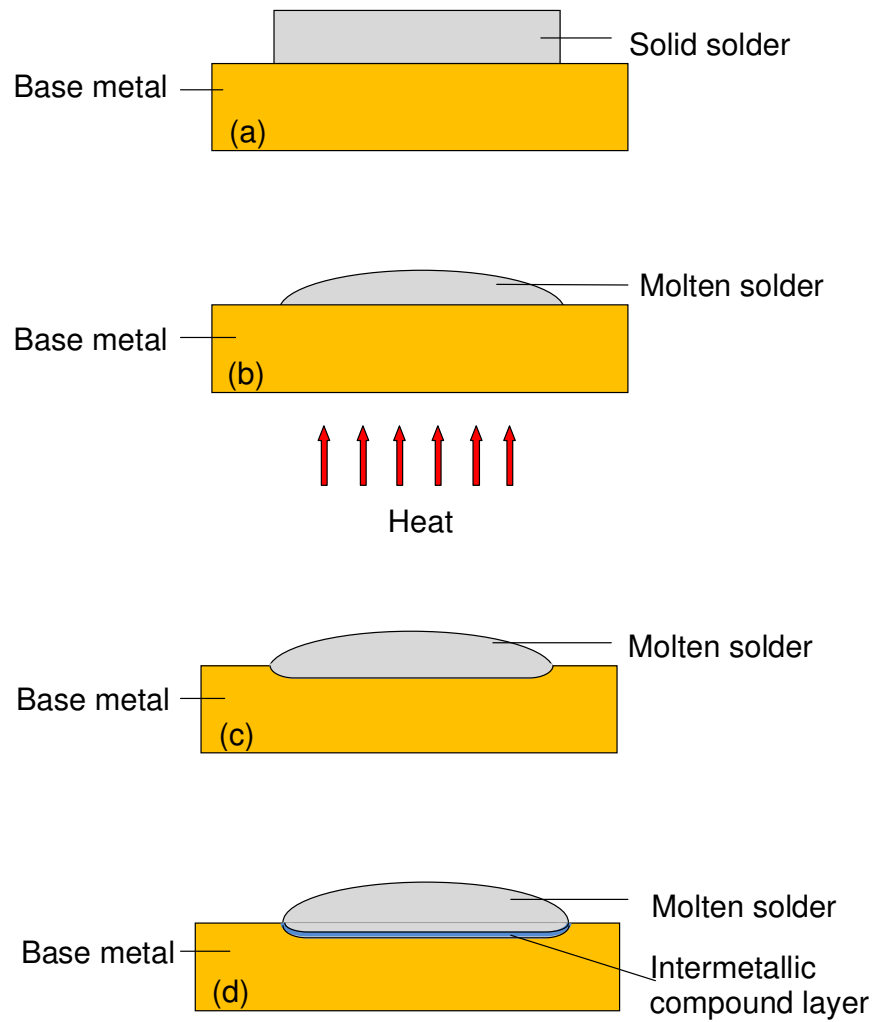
Solder wetting process: (a) solid solder on the base metal, (b) liquid solder spreading over base metal during soldering, (c) base metal dissolving in liquid solder, and (d) base metal reacting with liquid solder to form intermetallic compound layer (modified from Lea, 1988).
